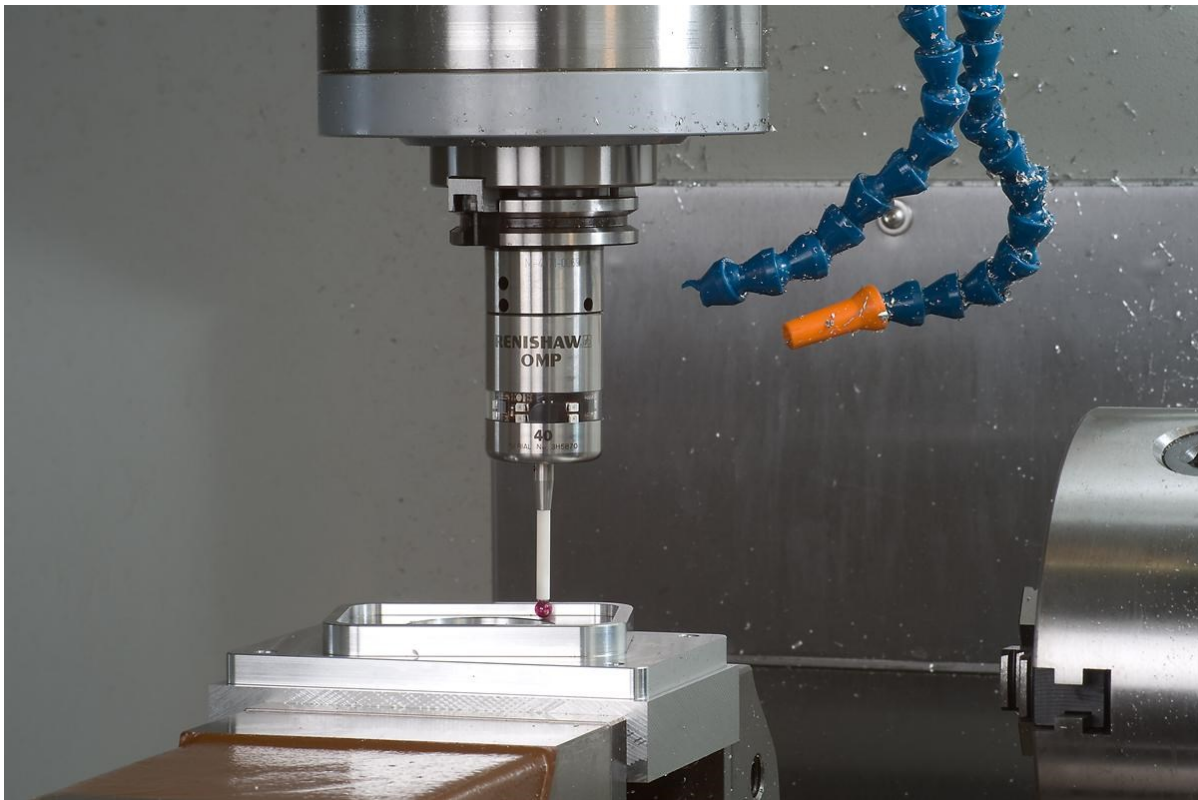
Renishaw OMP40-2 probing a workpiece on CNC machine tool [6]
